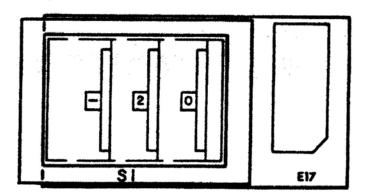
Type 791827 BFO Switch (A9), Location of Components
